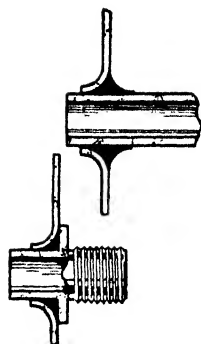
SHOWING TUBE AND CONNECTION SOLDERED IN PUNCHED HOLE
